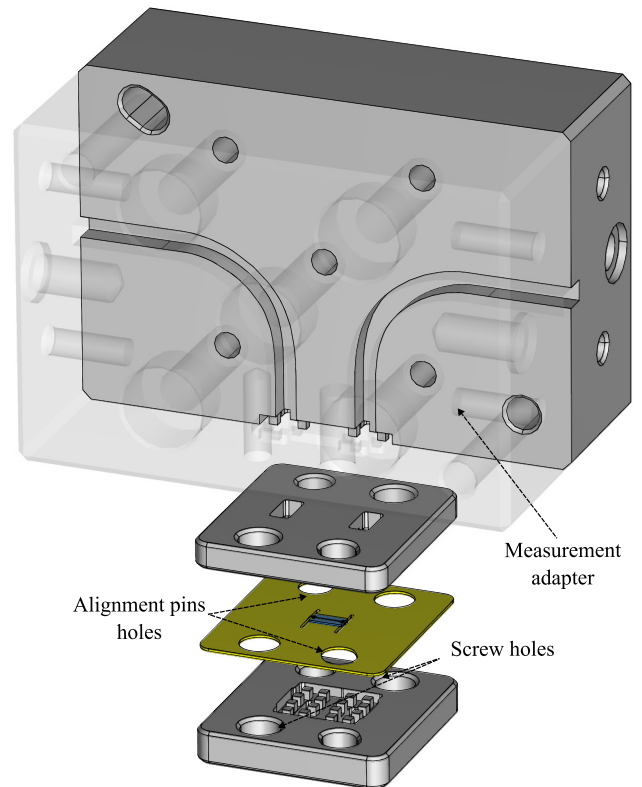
Mechanical model of the B2B prototype, illustrating the substrate-less bondwire packaging concept and the measurement adapter.
